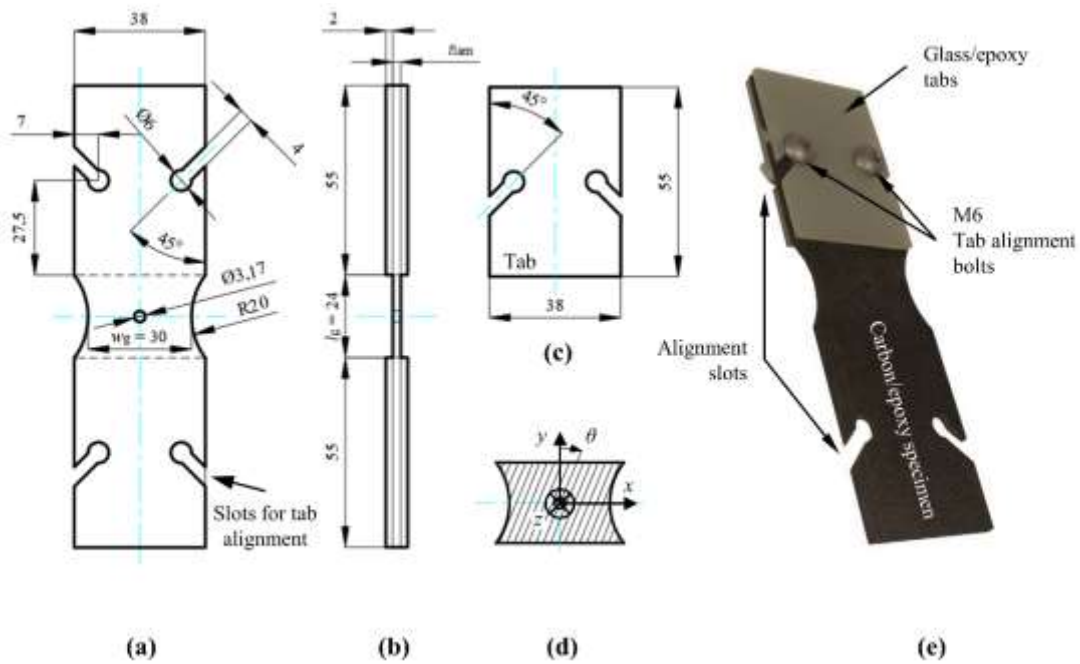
Specimen design; (a) in-plane view and (b) side view of the assembled specimen, (c) glass/epoxy tab, (d) definition of fibre orientation angle, θ , and (e) tabbing procedure using alignment slots and bolts. Dimensions given in mm.
